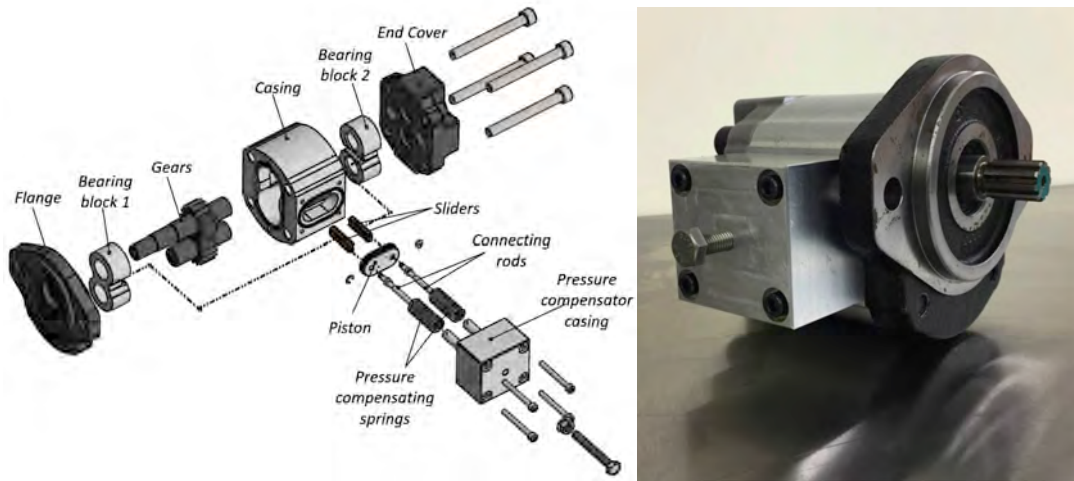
Exploded view and picture of the VD-EGM prototype realized in 2014
